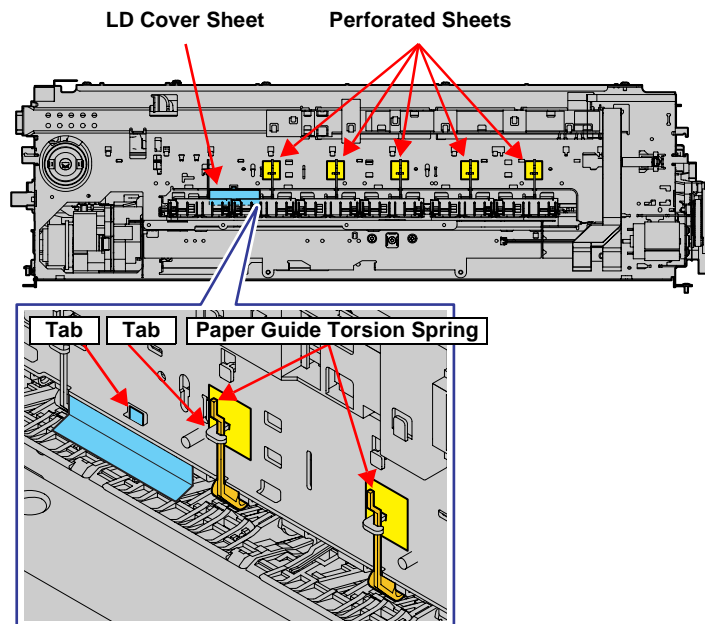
Attaching the Perforated Sheets and the LD Cover Sheet
